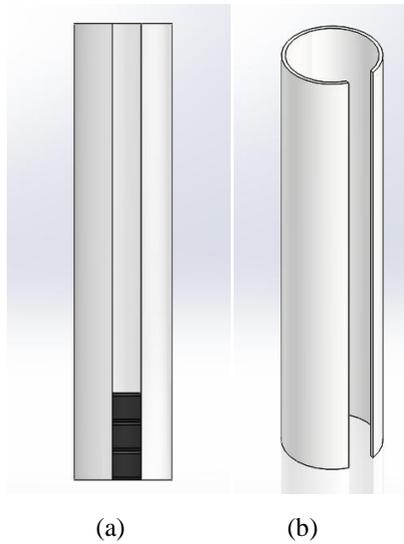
Puck storage cylinder containing pucks (a) and empty (b) [13].
